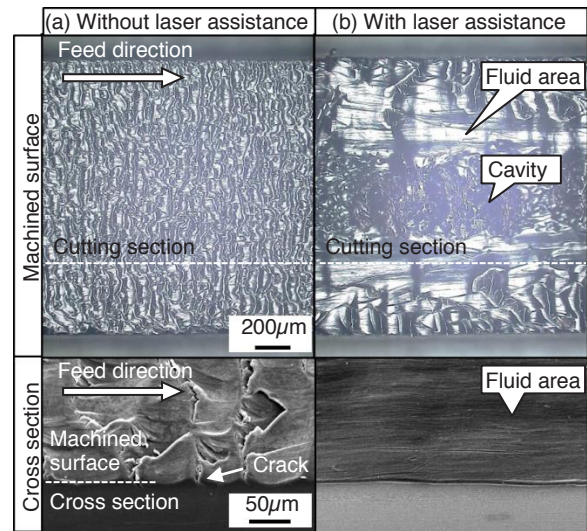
Surfaces and cross sections of PBI machined using orthogonal cutting (a) without and (b) with laser assistance.
